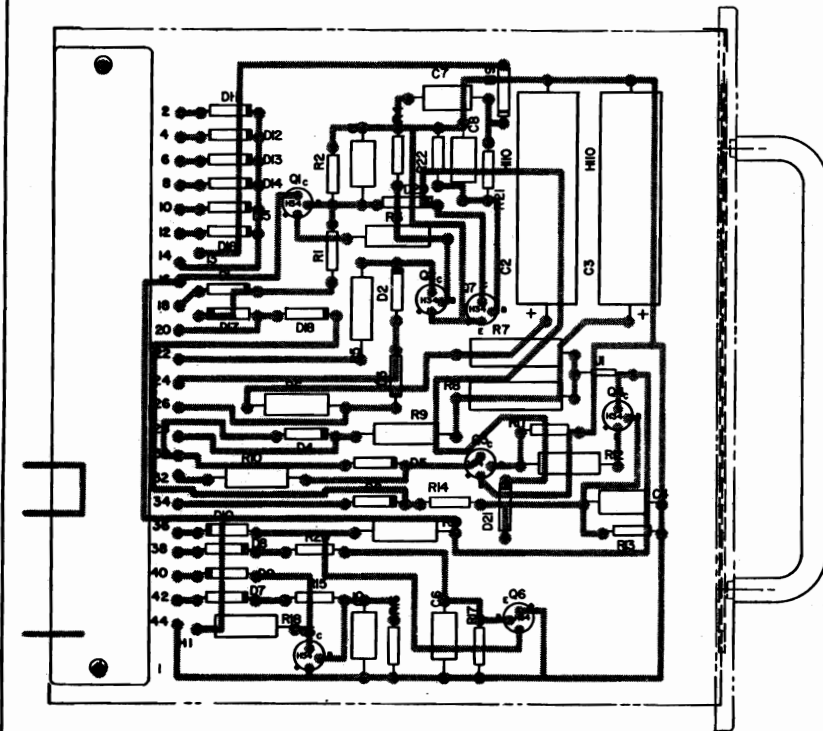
CIRCUIT LAYOUT FD716 WHEELSLIP DRIVER AND INVERTER CARD. E-19642
